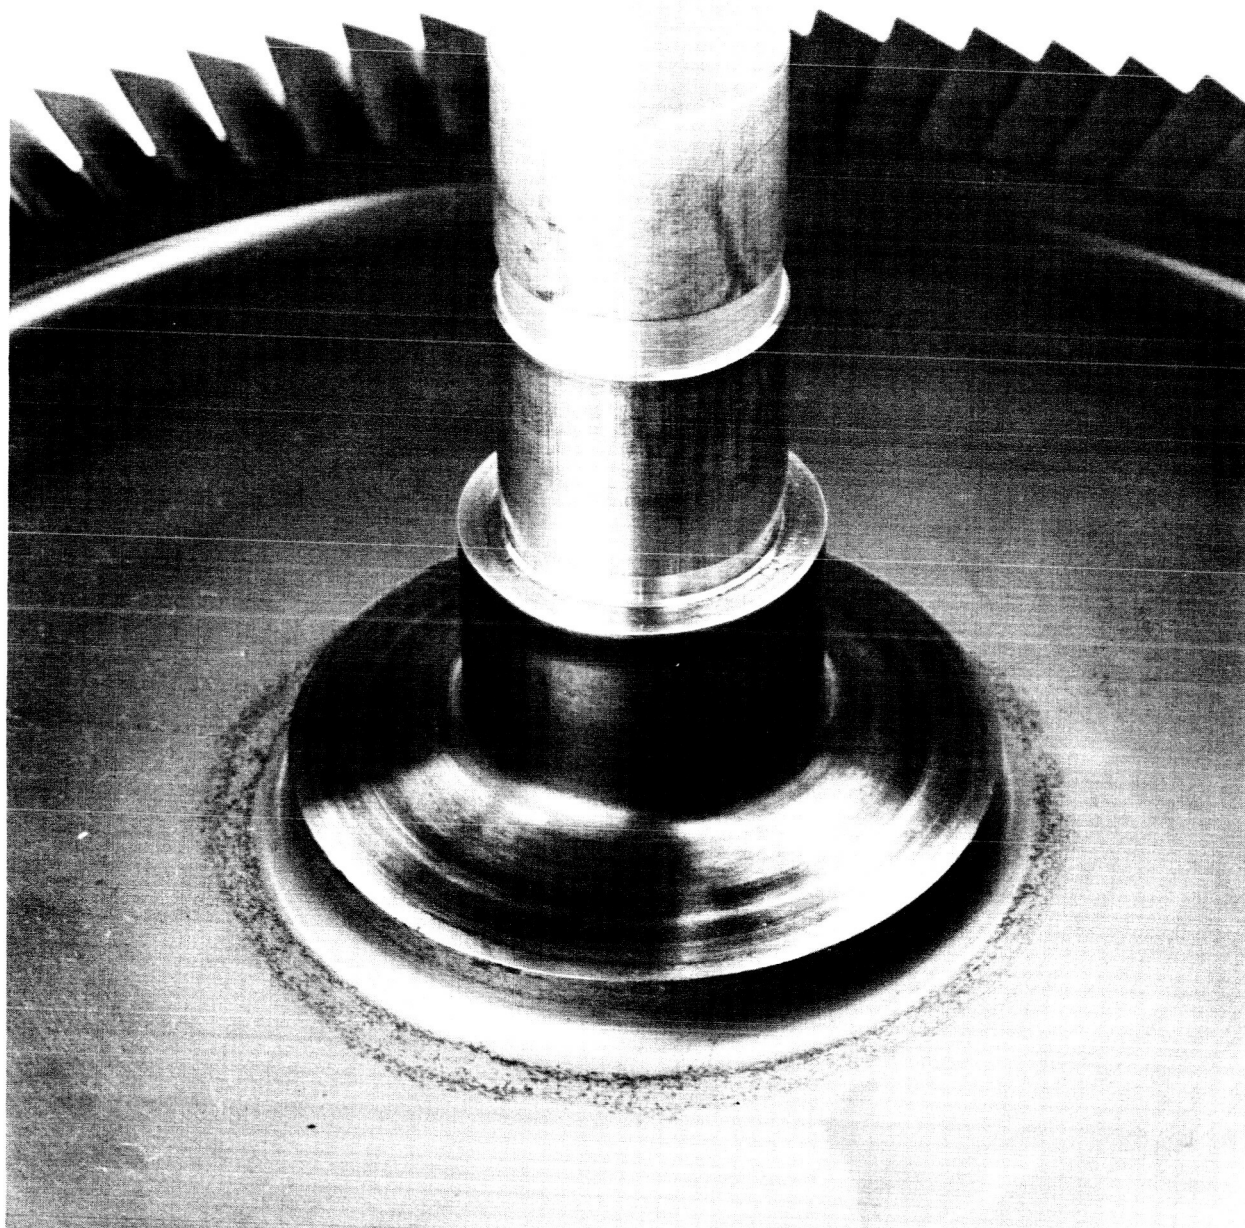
CLOSE-UP OF TURBINE WHEEL AND SHAFT
